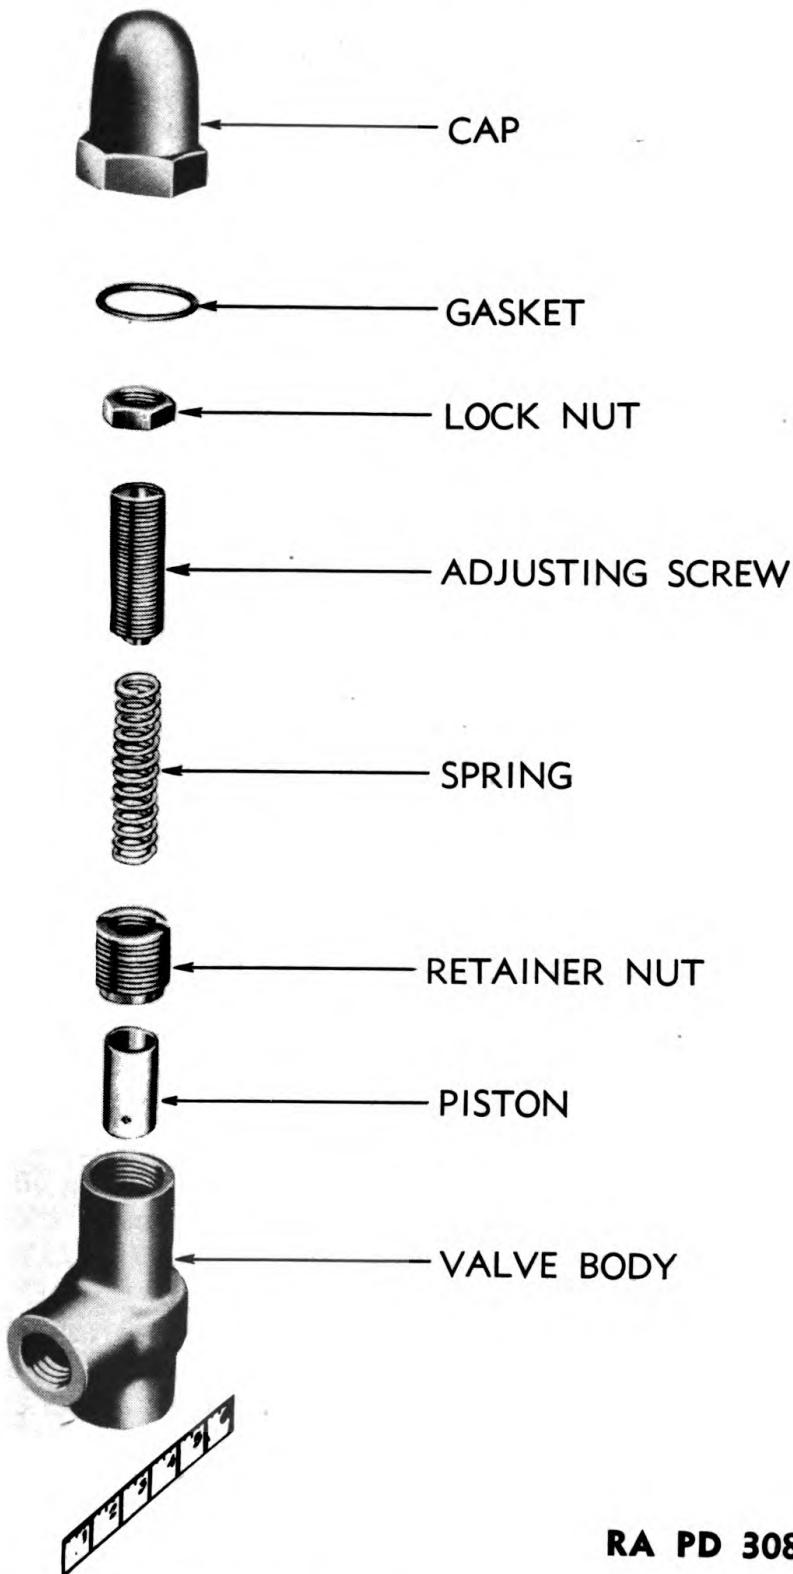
Transmission Oil Pressure Relief Valve Disassembled
